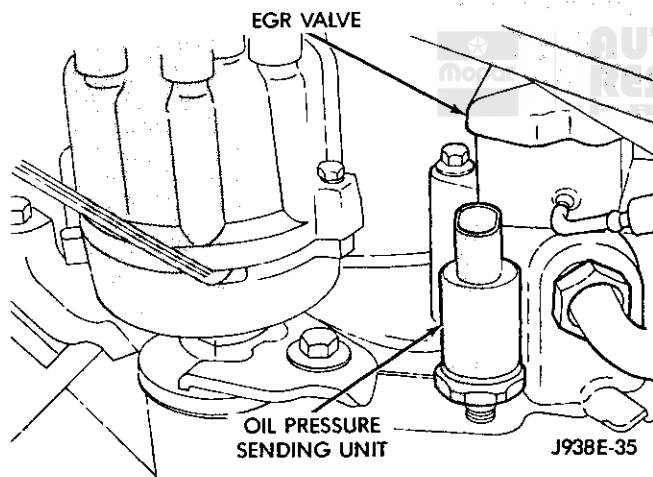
Oil Pressure Switch/Sending Unit - V-6/V-8 Engine
